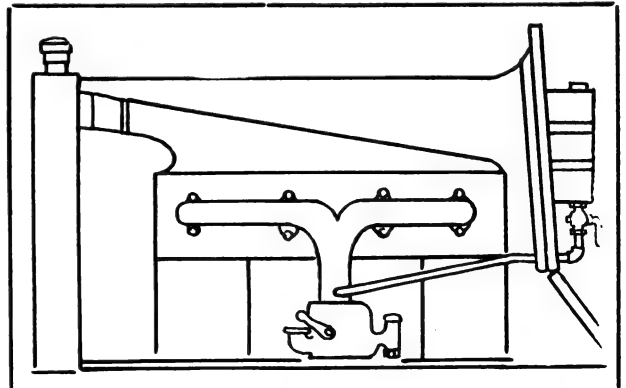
Engine Priming System Designed to Supply Fuel to the Intake Manifold Above the Carburetor.
